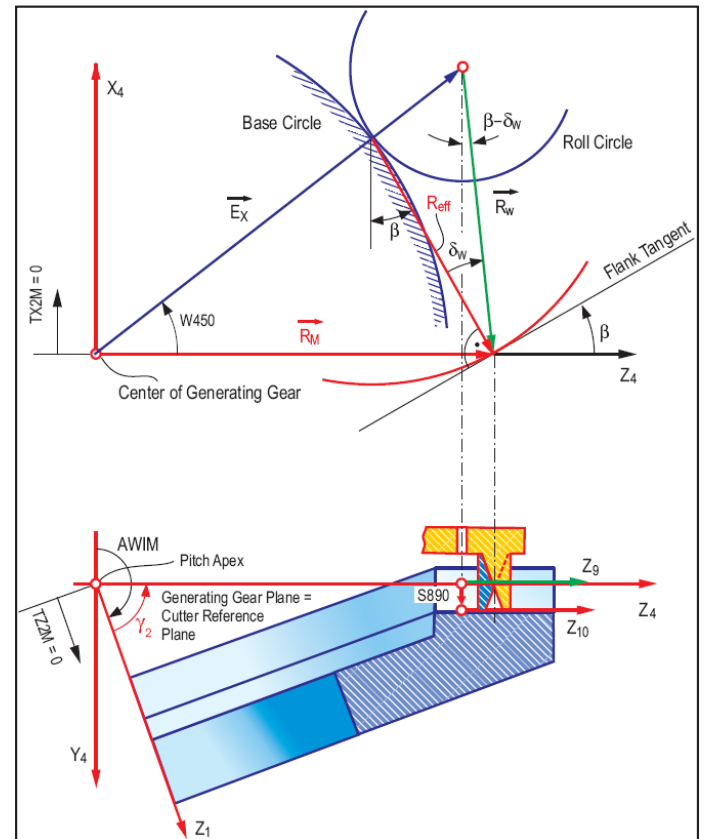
Ring gear, basic machine model, upper graphic: → front view; lower graphic → top view.
